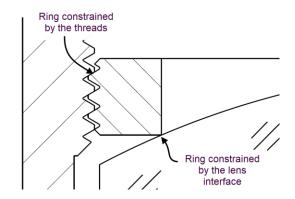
Threaded ring constrained by the top thread surface and by the lens optical surface.
